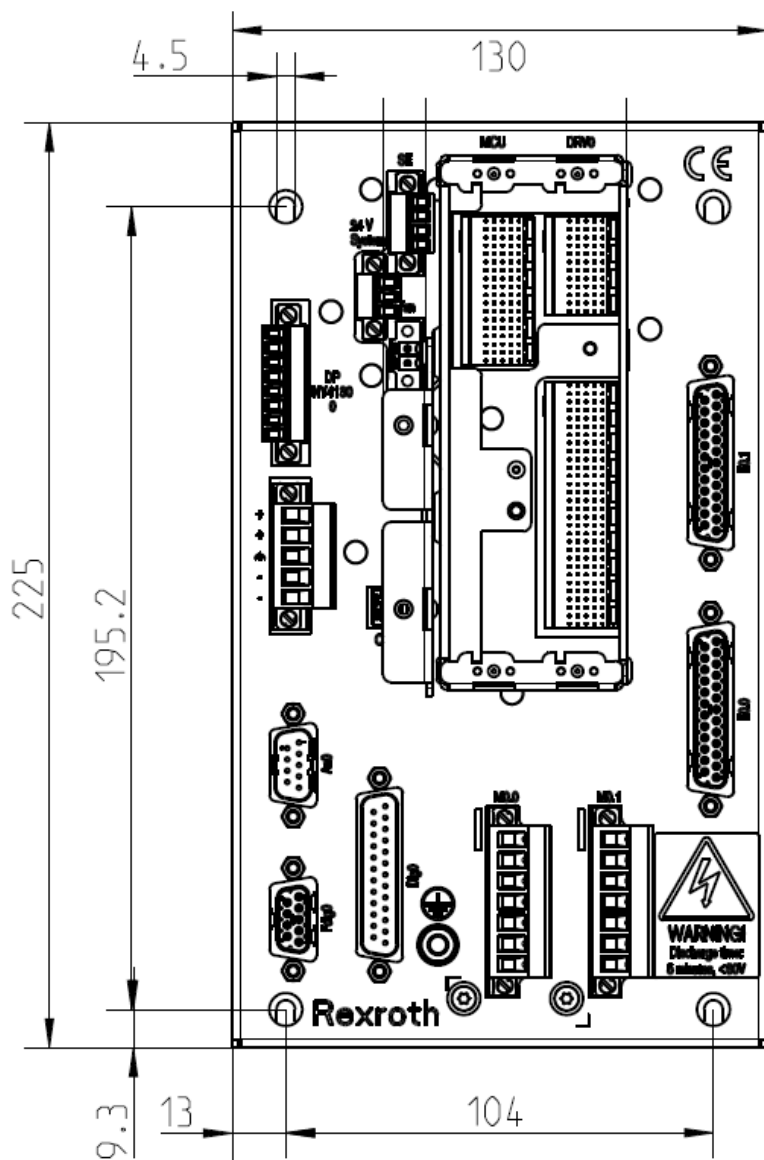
Dimensions (front view) of the NYS04.2-ST-01-ULNN-NY4013
